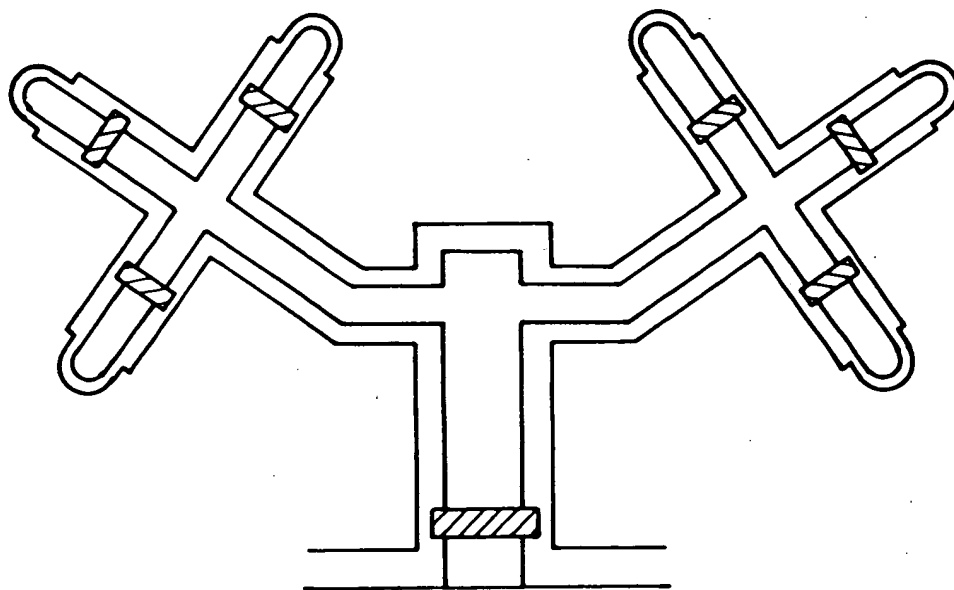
Forehearth for marble manufacture. An example to supply six machine positions, one at the end of each limb.
